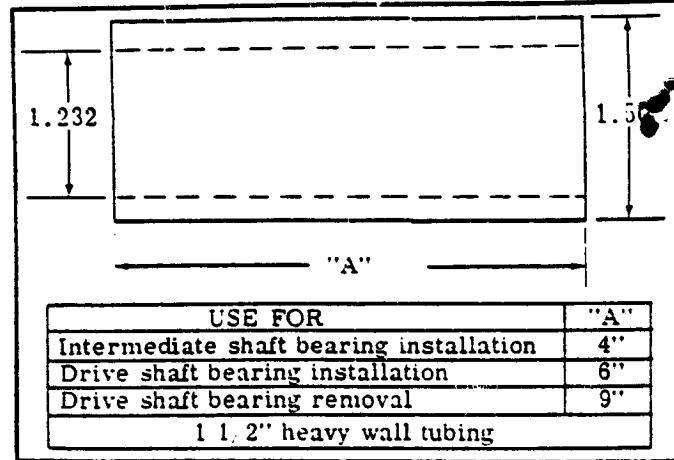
Special Shaft Bearing Removal and Installation Tools.
